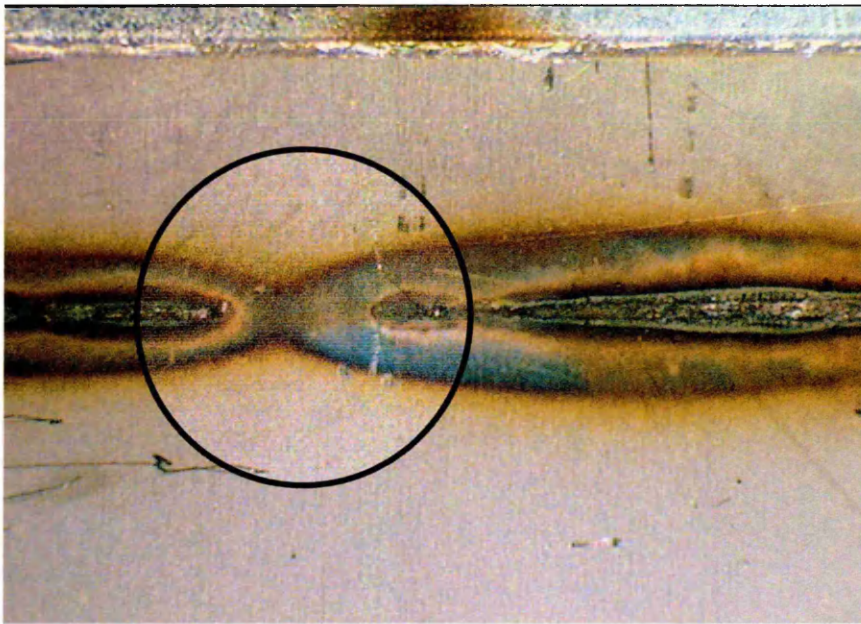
Weld bead penetration breakdown in a 1.2mm V1437 (top) – 1mm 304 laser welded lap joint
